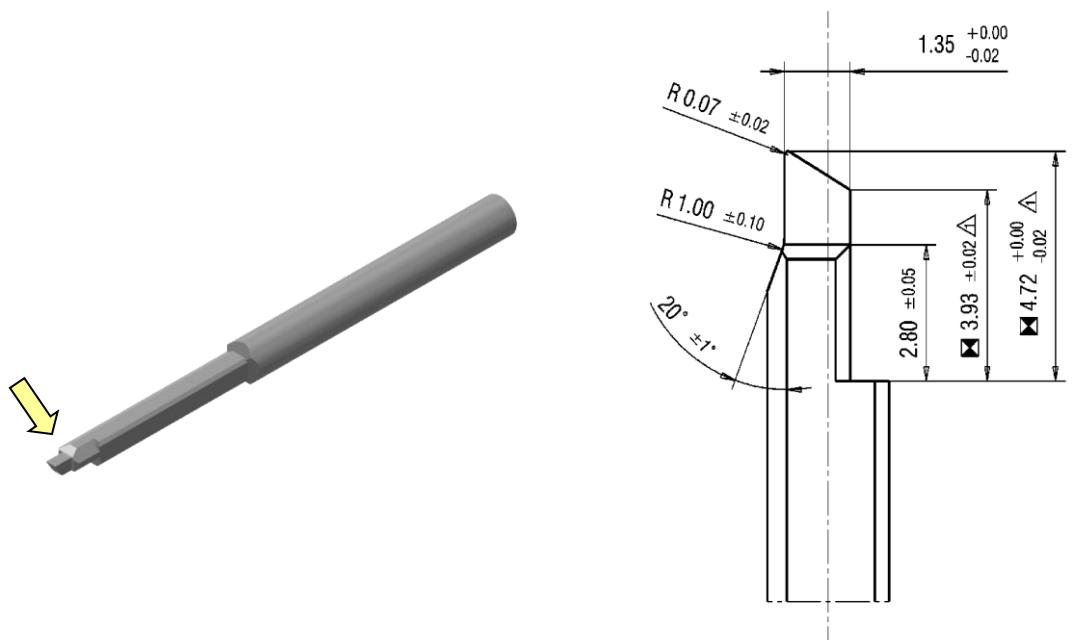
1.2 terminal removal tool / Outil d'extraction des contacts 1.2
